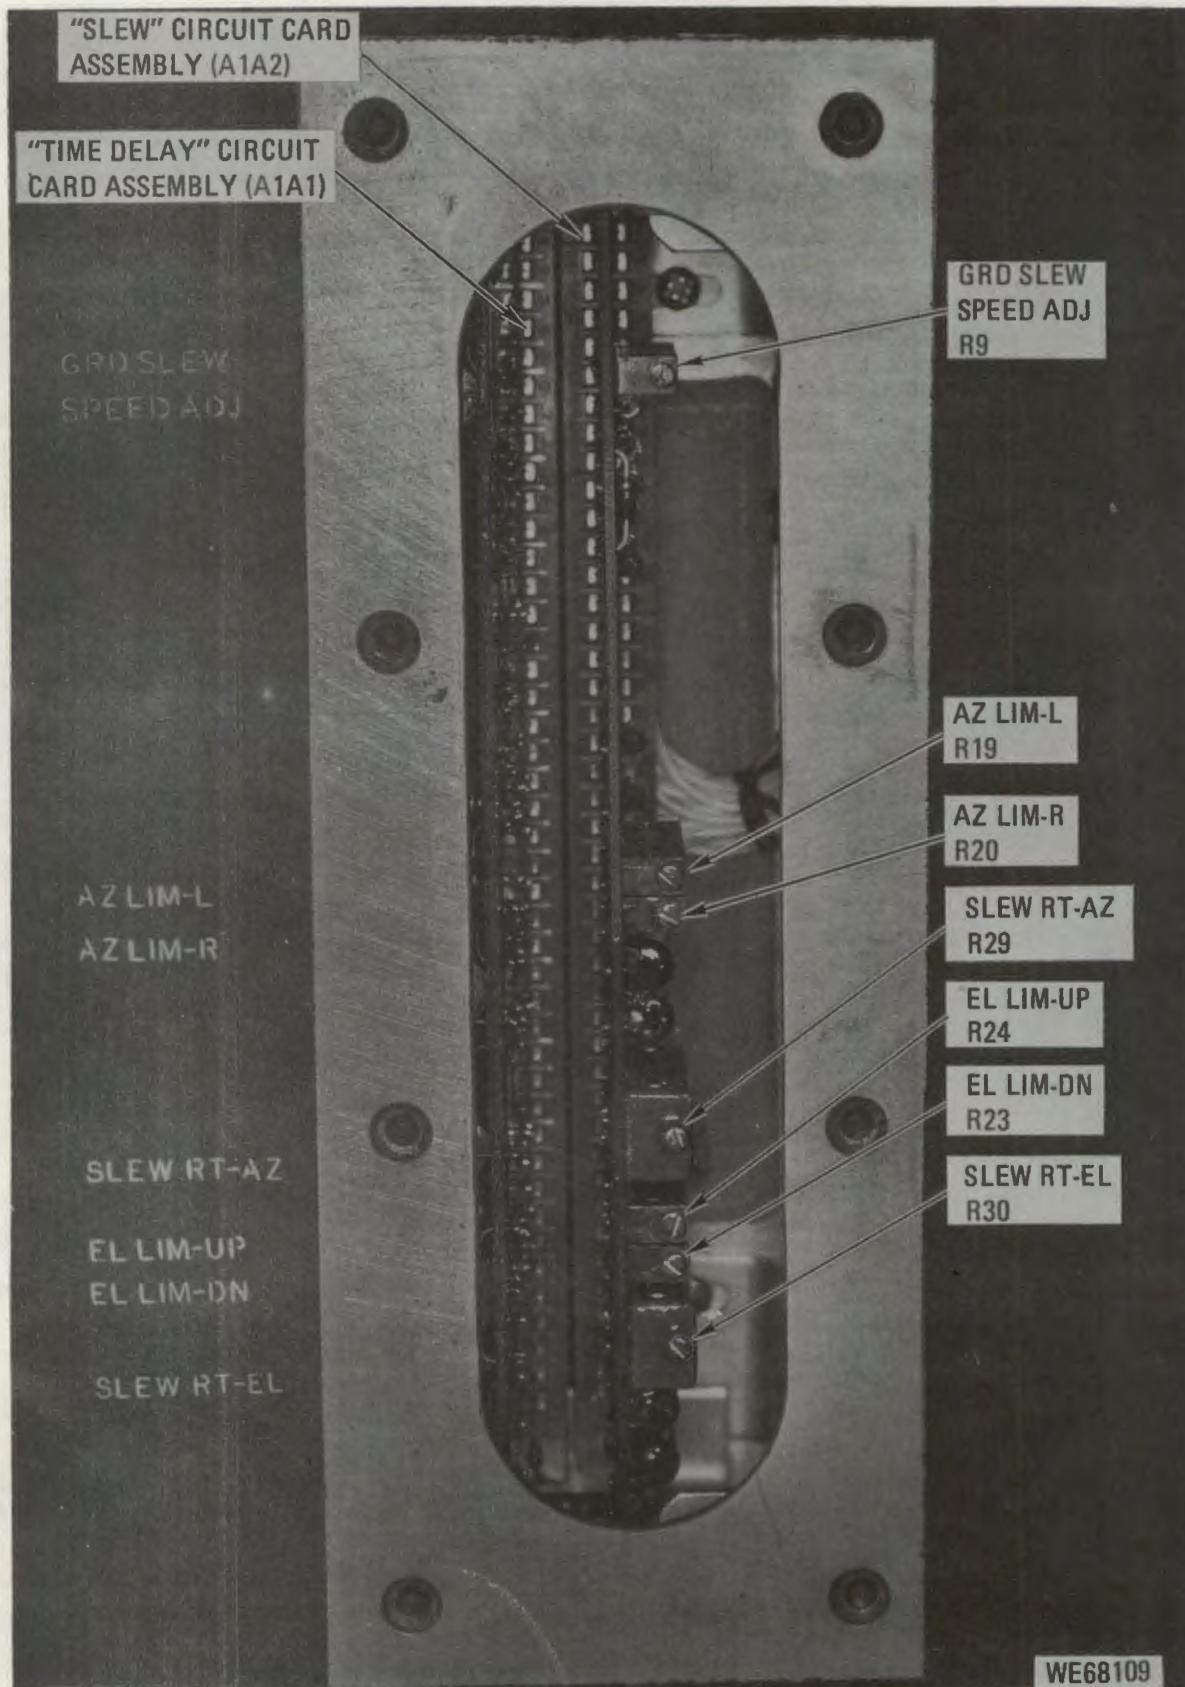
Distribution box, identification of circuit card assemblies and mount servo systems adjustment potentiometers, access plate removed (8437152) - sheet 1 of 2.
